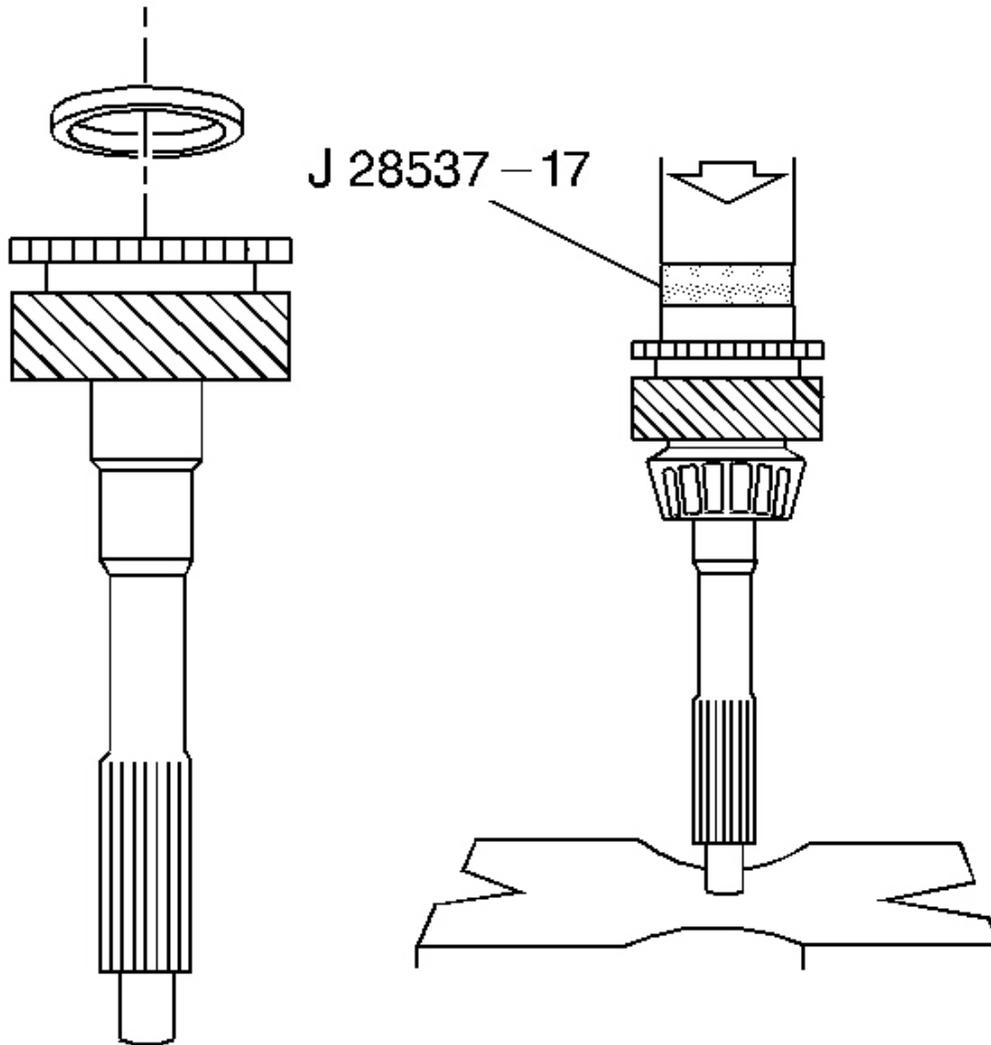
Installing Input Shaft Bearing Race Using J 28537-17
